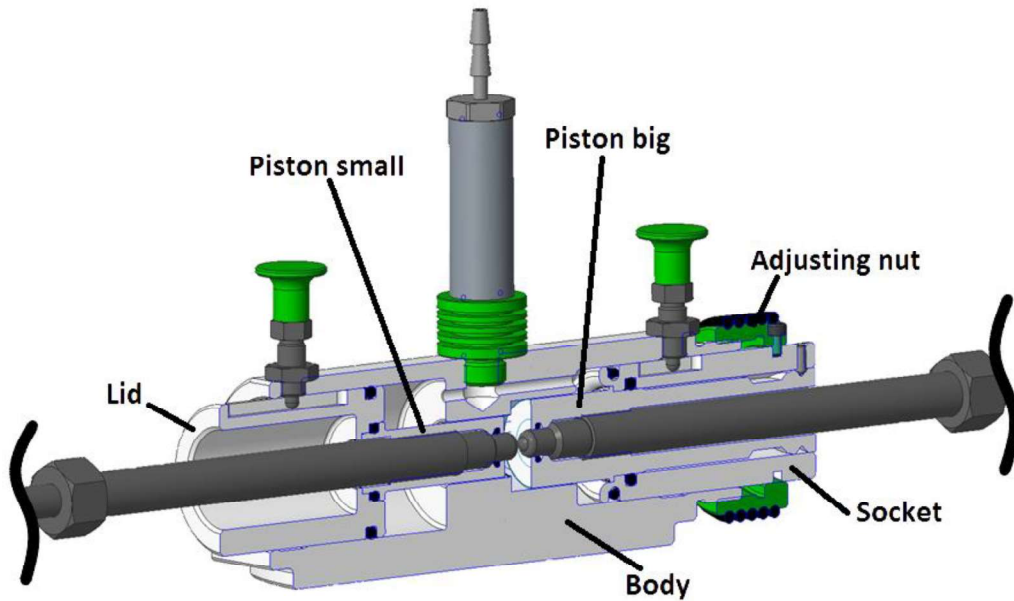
First prototype of the spectroscopy tool. Sectional view with peek (polyether ether ketone) elements (green), probes (dark grey) and the aluminum chamber with components (light grey).
